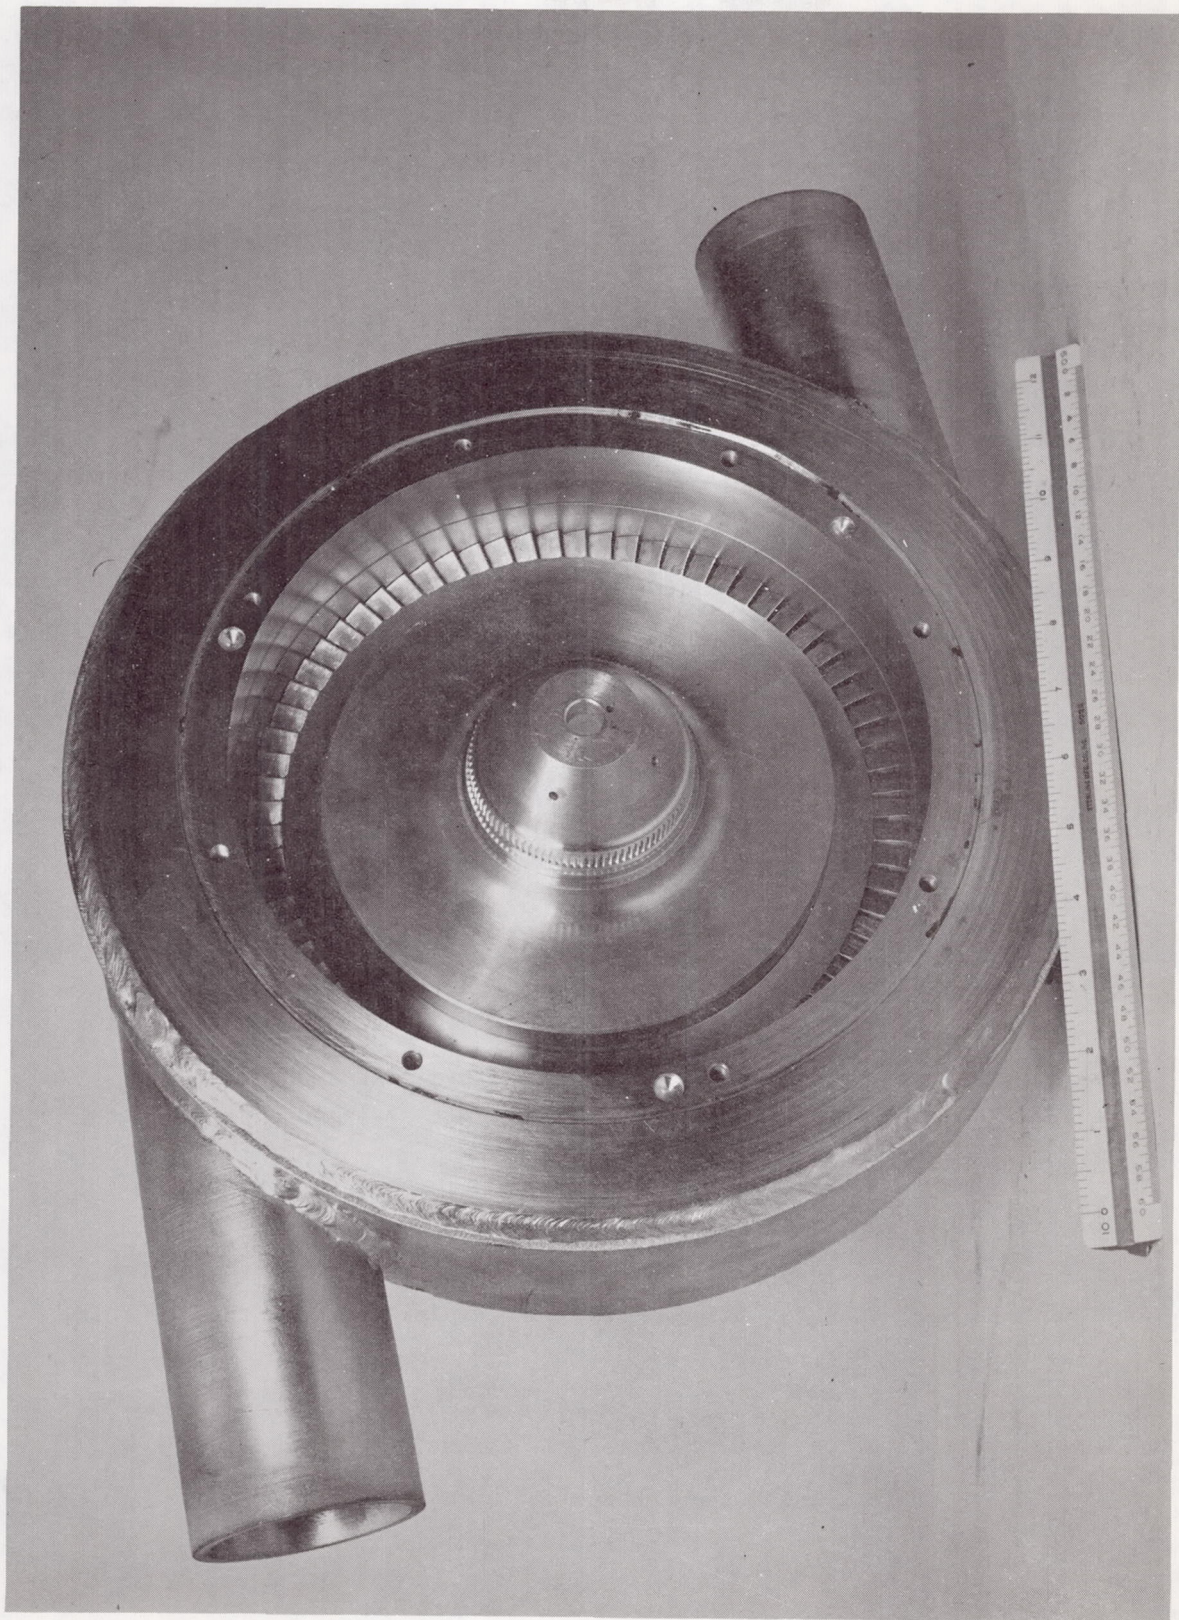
View of Simulator Turbine Wheel and Casing
